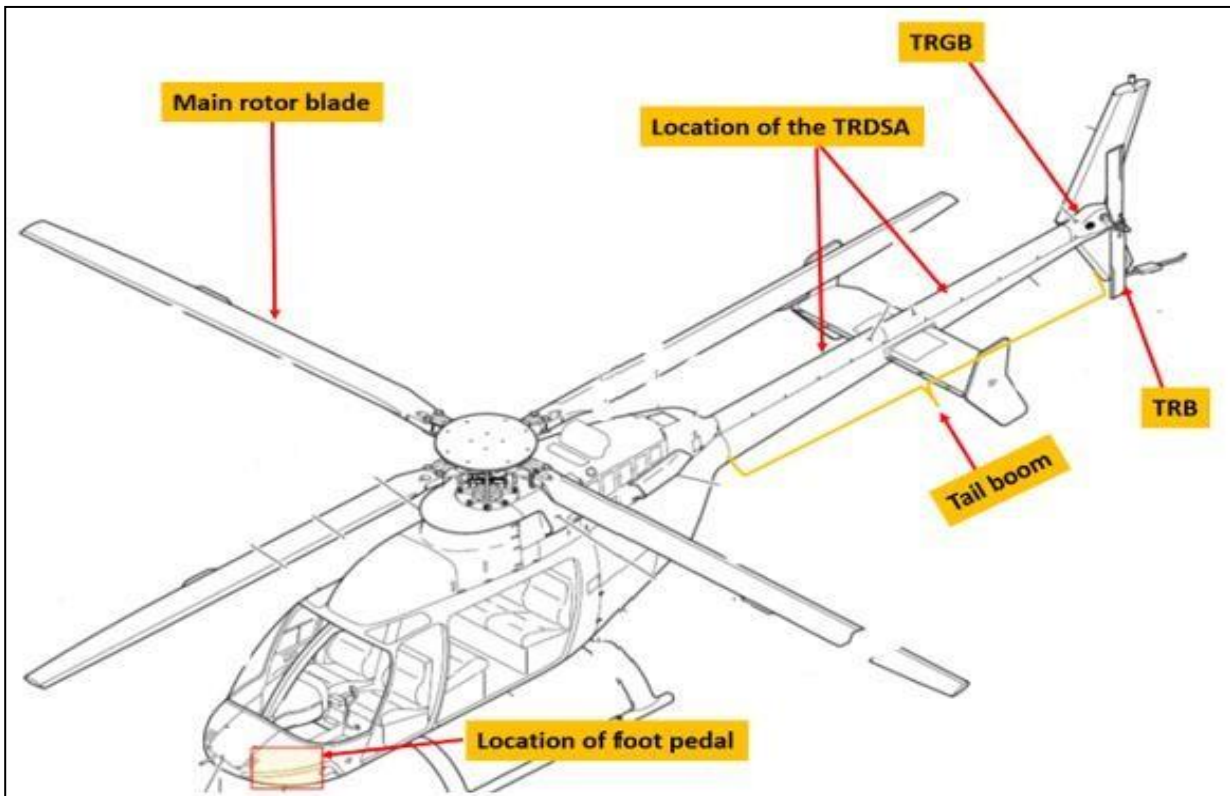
Bell 407 Helicopter Technical Diagram, illustrating the Tail Rotor Drive System
